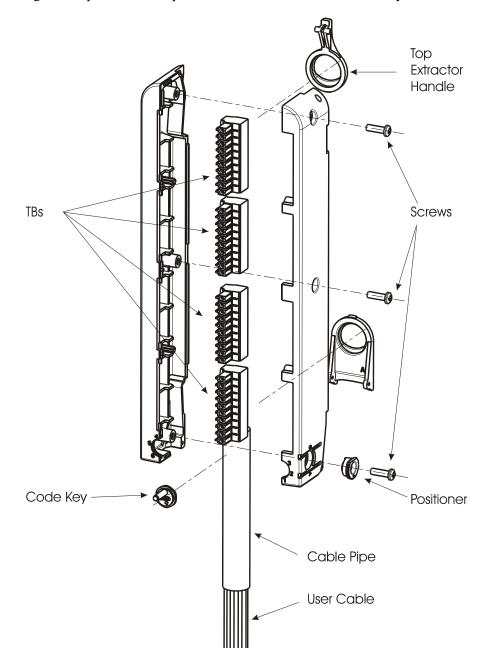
provides an exploded view of the TB holder assembly for four TBs.
